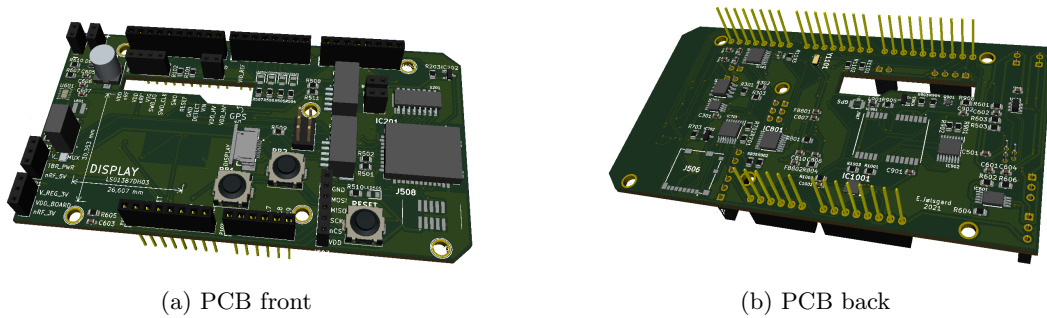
3D view of PCB using KiCad 3D Viewer
